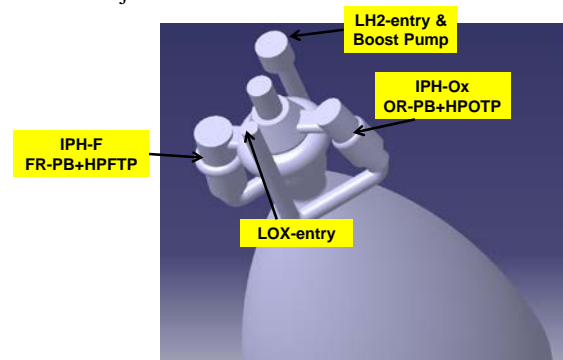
SLME simplified CAD geometry showing arrangement of turbomachinery
